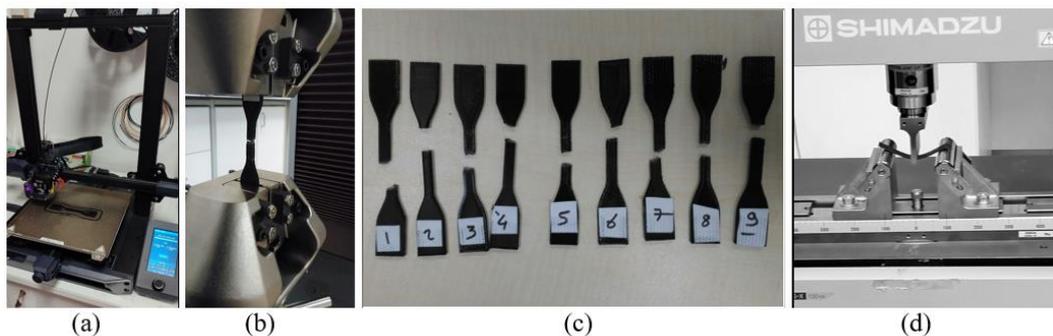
(a) PLA material samples printed using Ender 3 S1 pro printer (b) Tensile test (c) Broken tensile specimens (d) Flexural test.
